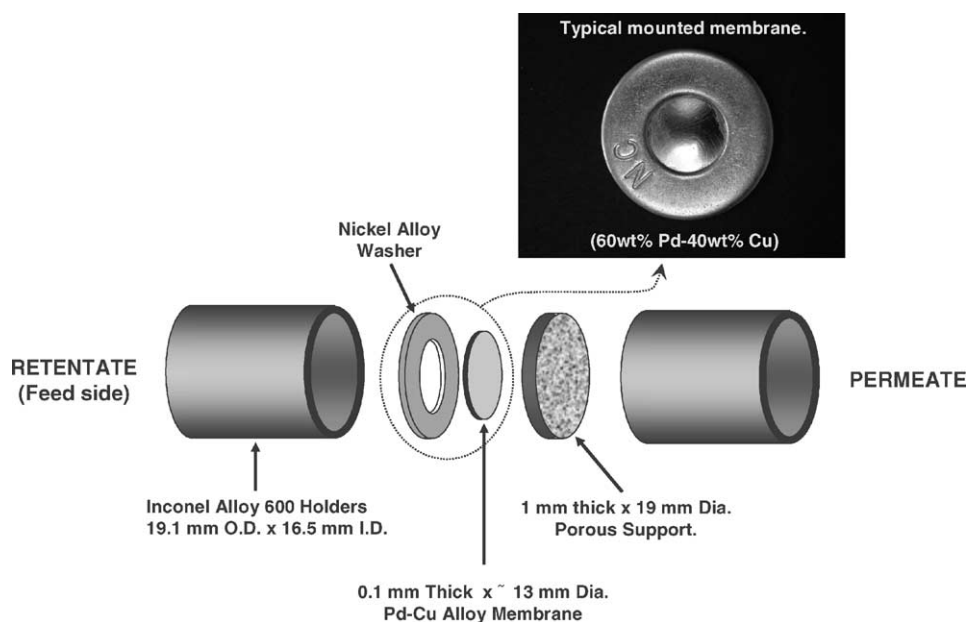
Schematic of the palladium–copper alloy membrane assembly.
